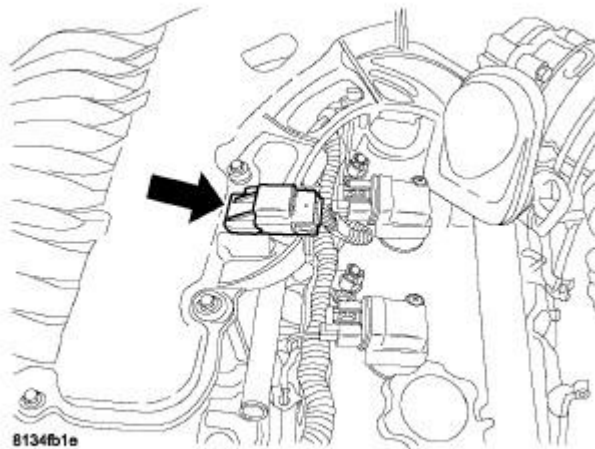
Locating Manifold Air Pressure (MAP) Sensor
